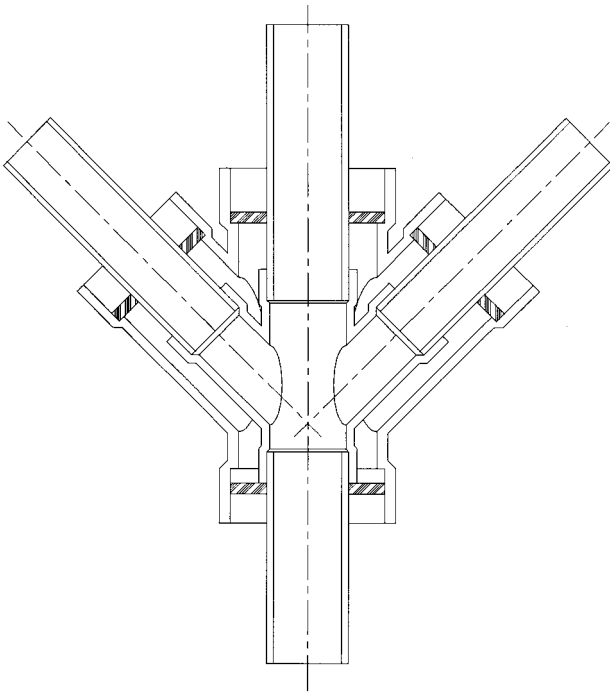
Example of thermoplastic 45° double reducing lateral (we) using molded code approved carrier fitting. (*Orion Fittings, Inc.*)
